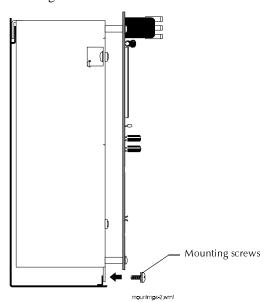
Mounting an MPS-400 into a CAB-X3
